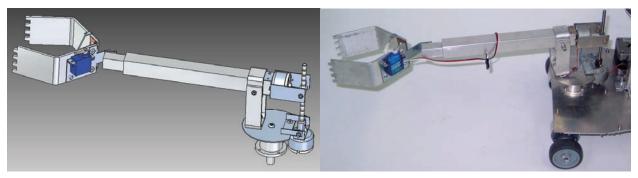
Modelled arm of "Inspector 1" robot and its actual construction [1]
